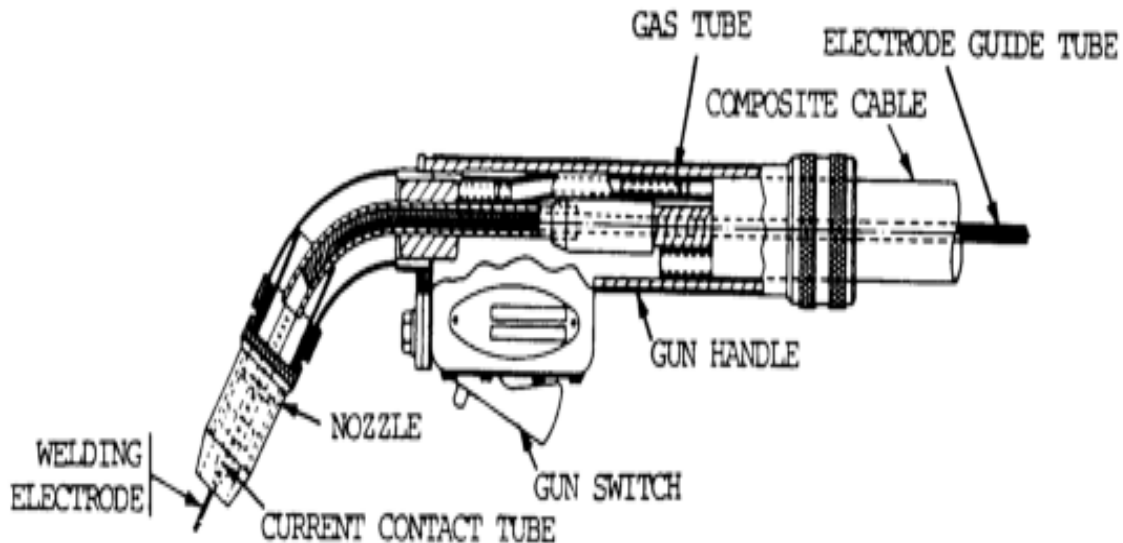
Typical semiautomatic gas-cooled, curved-neck gas metal arc welding gun.
